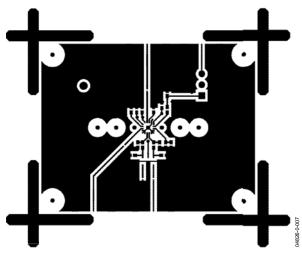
Single-Ended Evaluation Board, Component Side Layout
